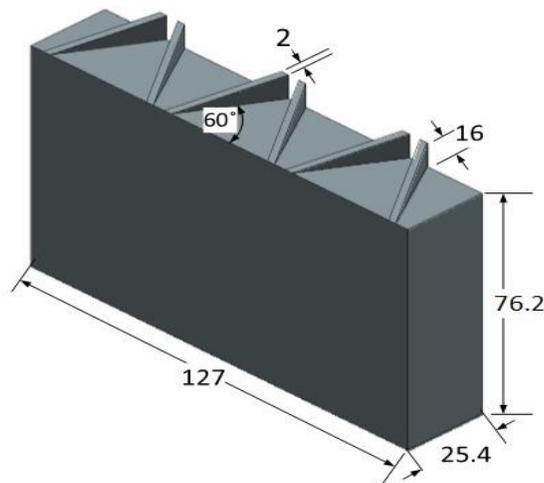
DELTA SPOILERS (ALL DIMENSIONS IN mm)
